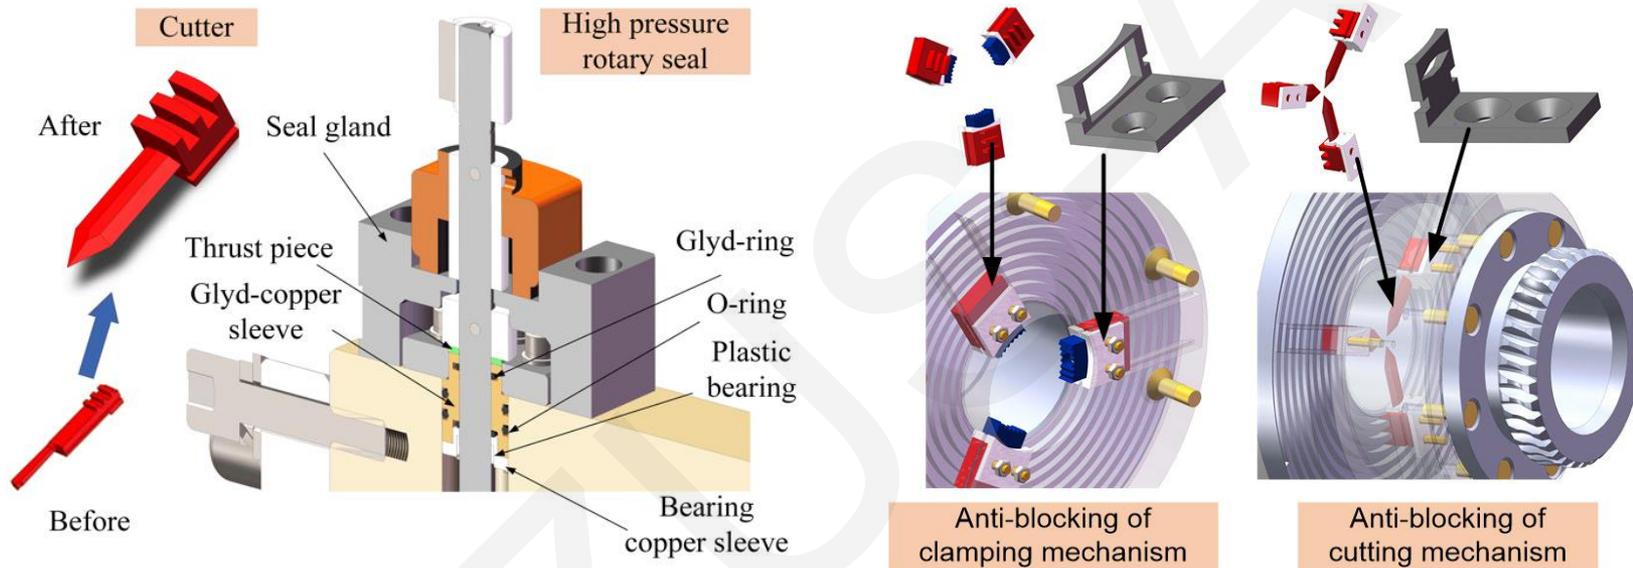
High Pressure Dynamic Seal and Cutter Improvement device and anti-blocking design
